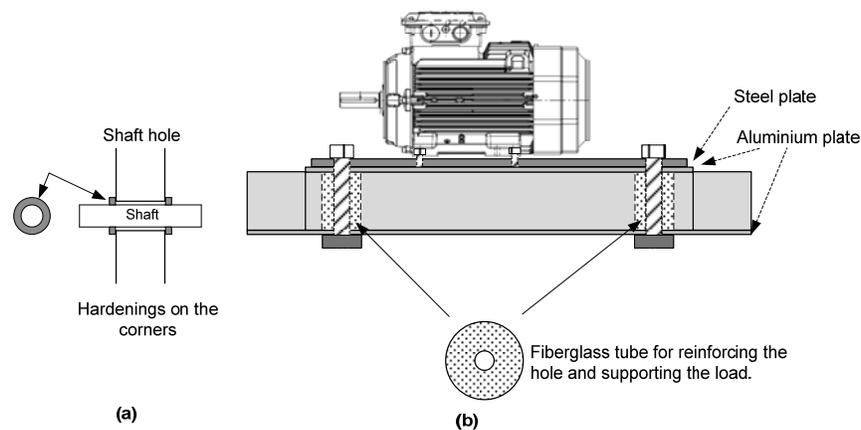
(a) Details of shaft hole, (b) Chamber support arrangement
